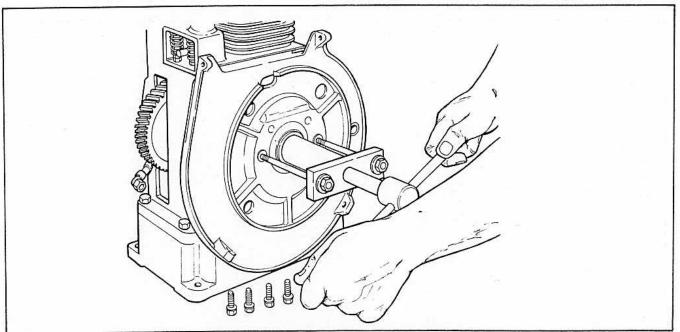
REMOVING BEARING PLATE WITH PULLER
